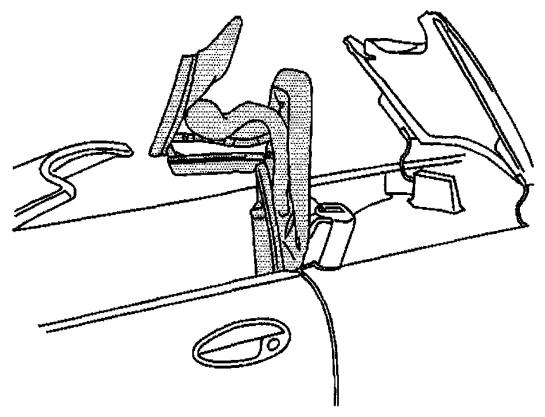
Identifying Rear Side Rail Rivets Courtesy of GENERAL MOTORS CORP.
